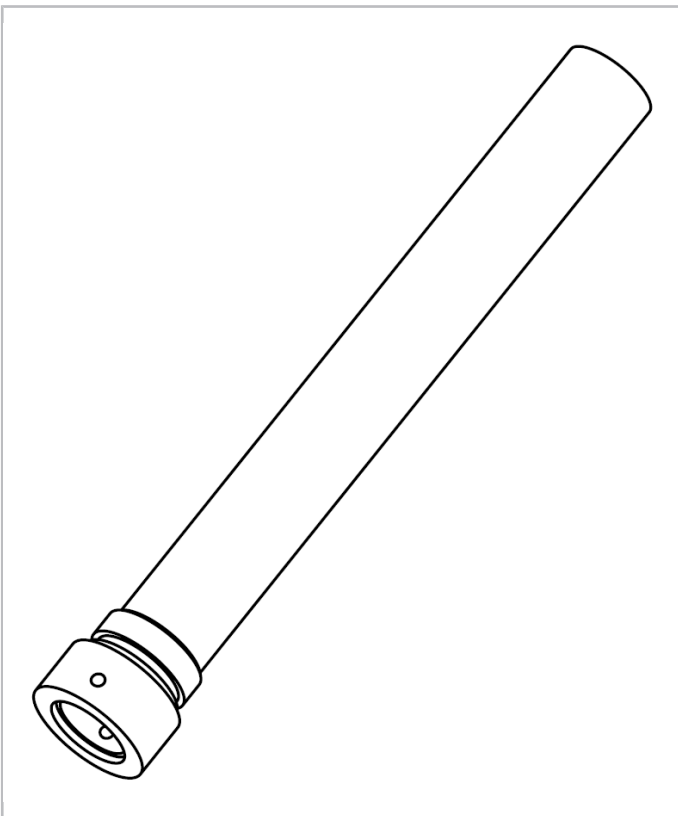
Sketch of heater sleeve with part no. 345 905 15
